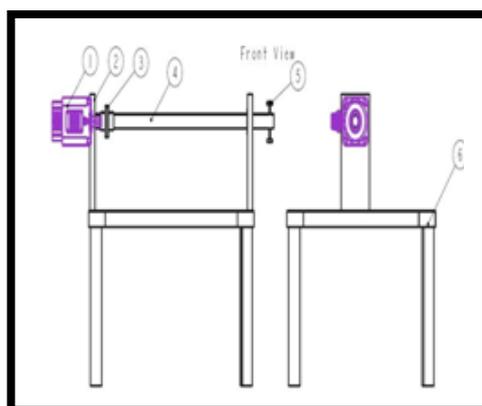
Line Diagram of the Machine – 1 specifically for extracting and yarn making – Front view
